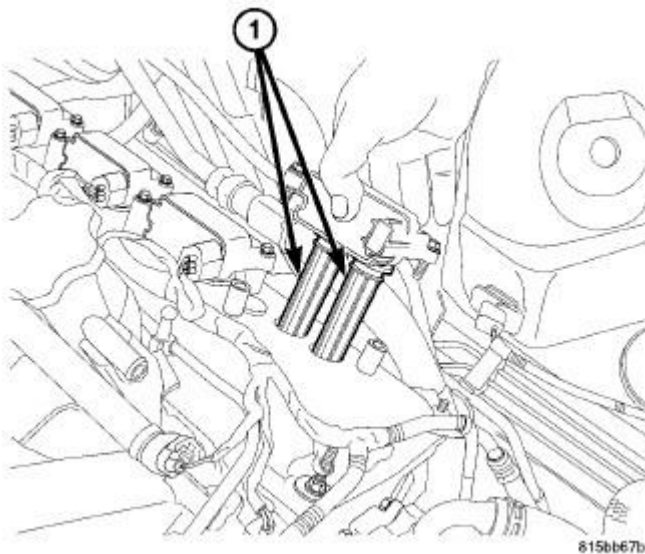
IGNITION COIL REMOVAL - 6.1L
